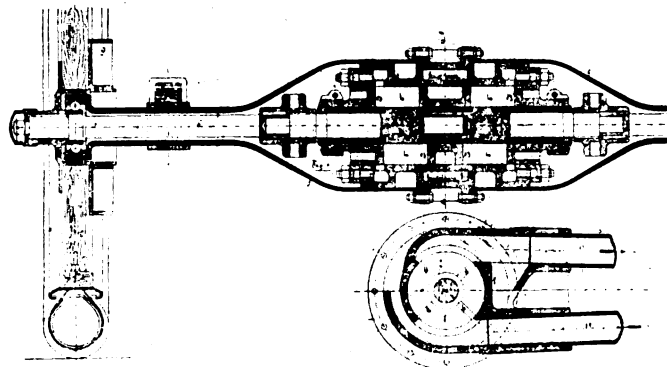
Part Sectional views of Rear Axle with Pittler Transmission.
